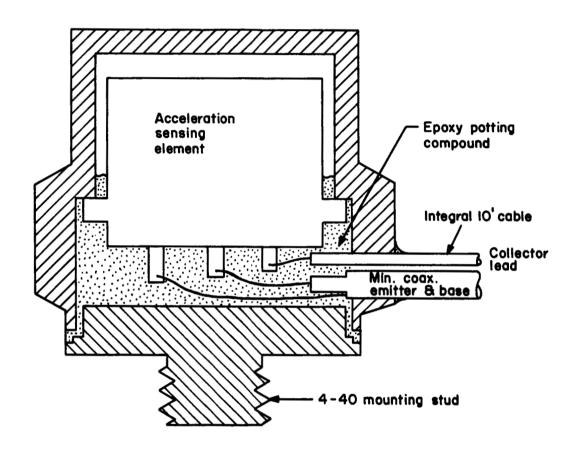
Sectional View of Packaged Piezotransistor Accelerometer
